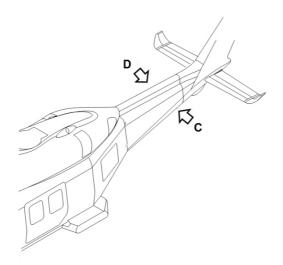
Tail section - Bonded skin panels - Detailed inspection (Sheet 1 of 6)
